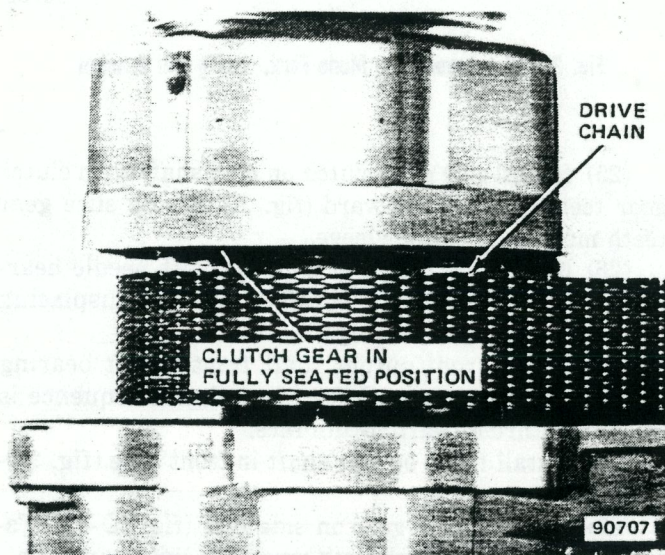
D-67 Seating Viscous Coupling on Clutch Gear
